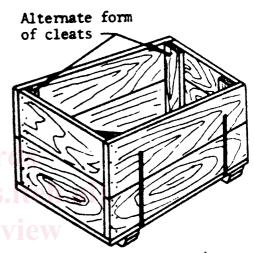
Style 5 Nail Wood Box<sup>A</sup>
